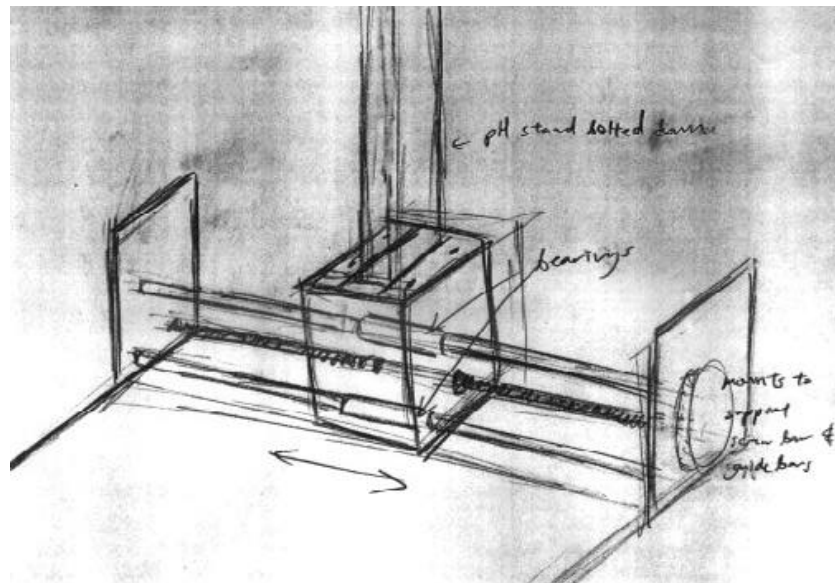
The stand base connects to the mast with a linear bearing rod. This is responsible for its side-to-side movement.
